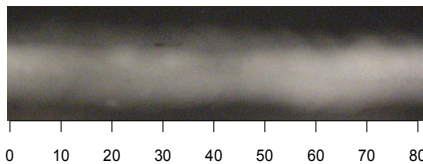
Radiogram of joint B, welding incompatibility 35 ÷ 35 mm – lack of side fusion (4011).
